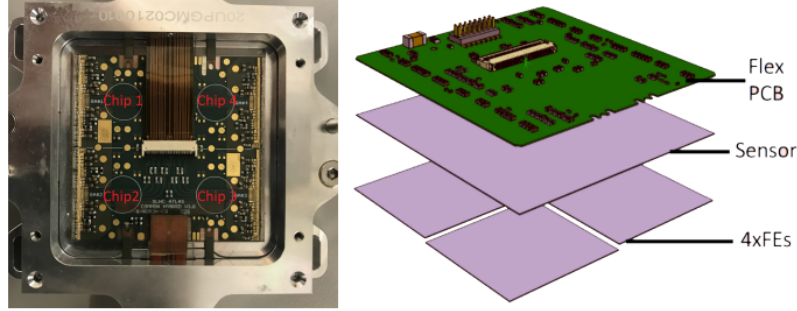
Assembled quad module (left) and exploded view of the module (right). (ATLAS ITk Collaboration, 2021)
